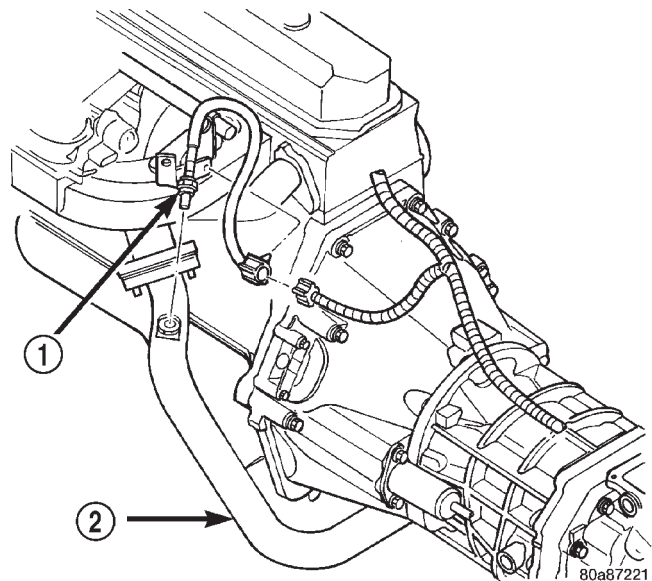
Upstream Oxygen Sensor—2.5L Engine
